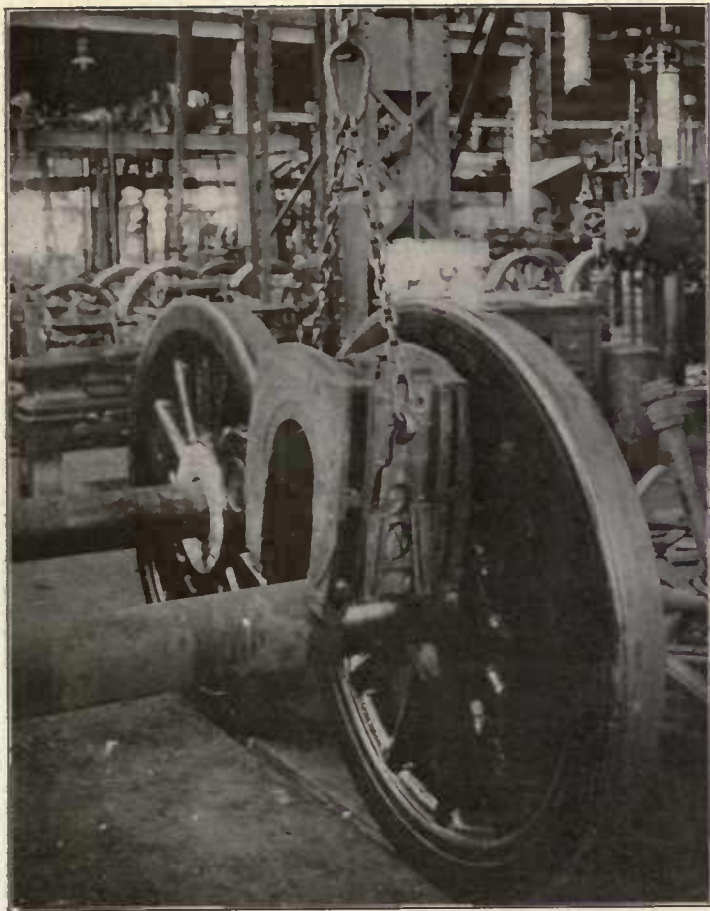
Expanding Wedge Device Used for Handling Driving Boxes.
